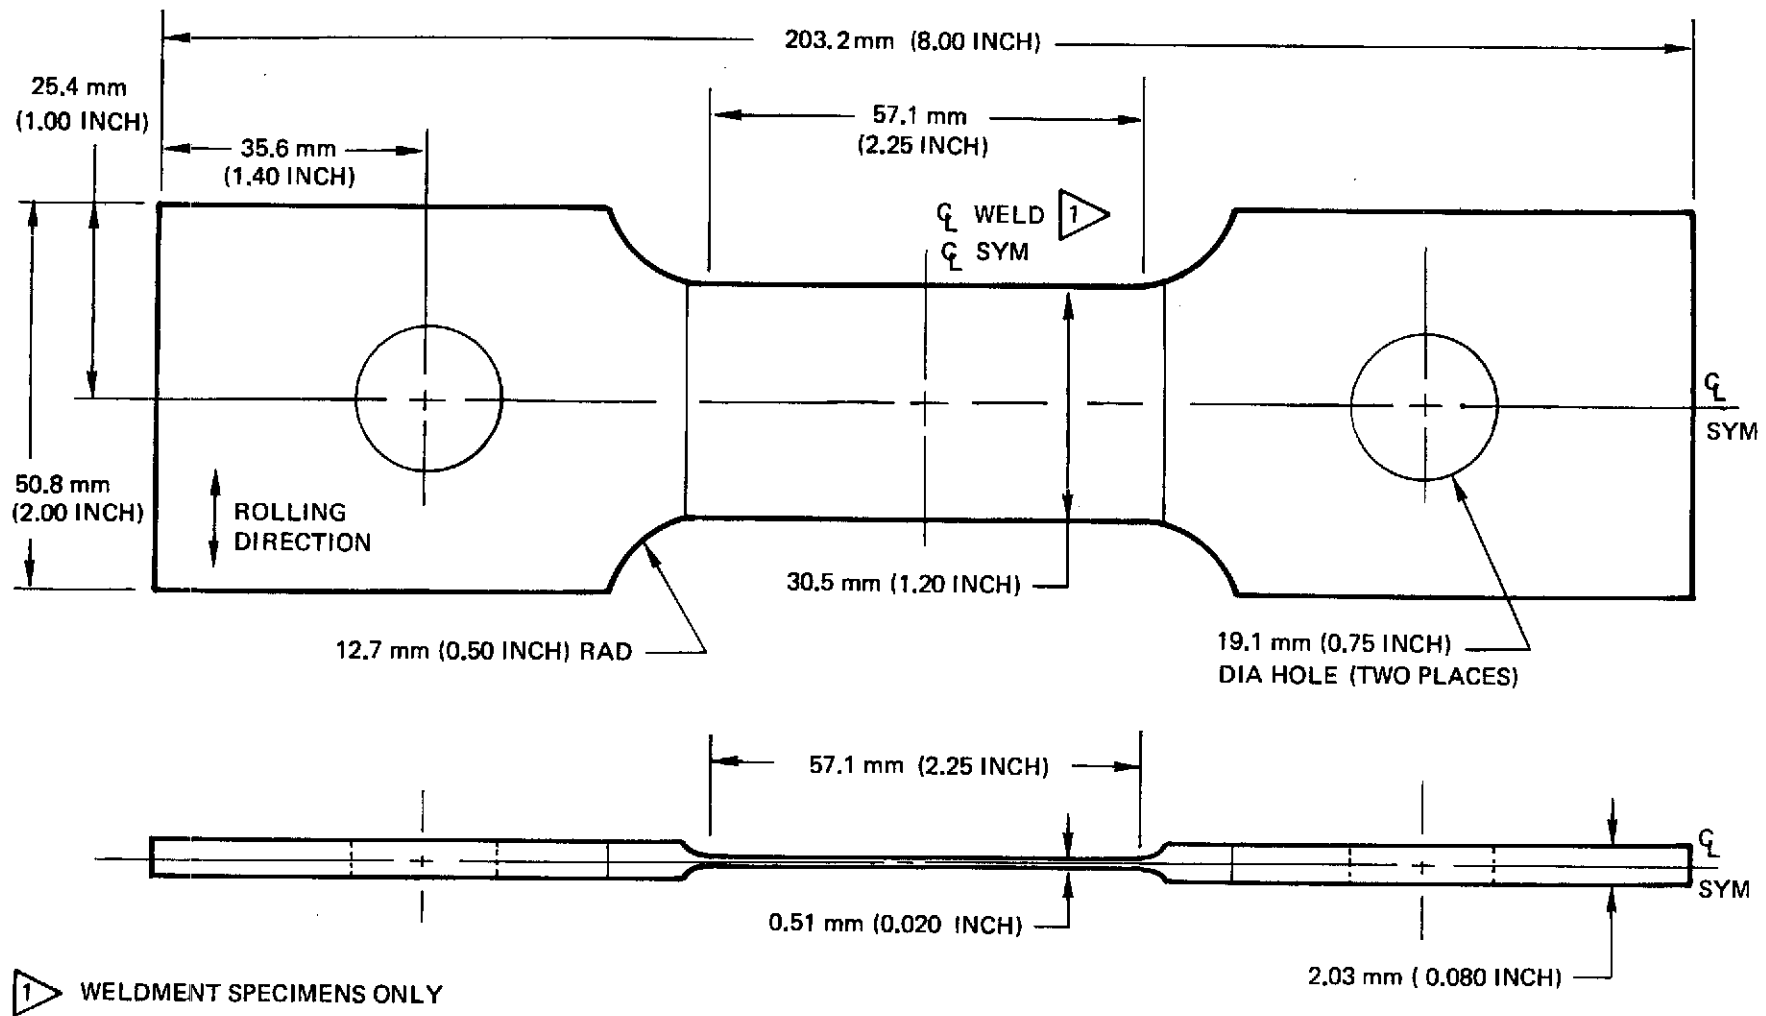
0.51 mm (0.020 INCH) THICK 6AL-4V TITANIUM ALLOY BASE METAL AND WELDMENT SPECIMEN
